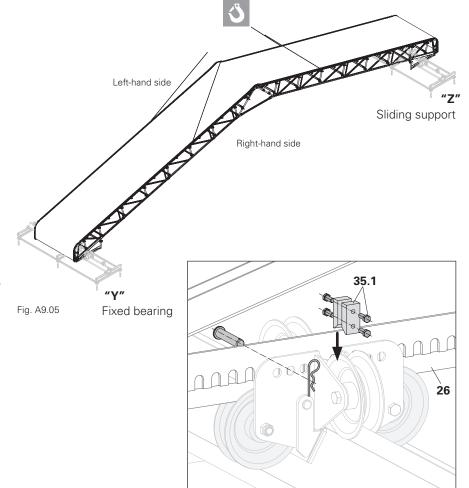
Bolts and cotter pins only on fixed bearing
